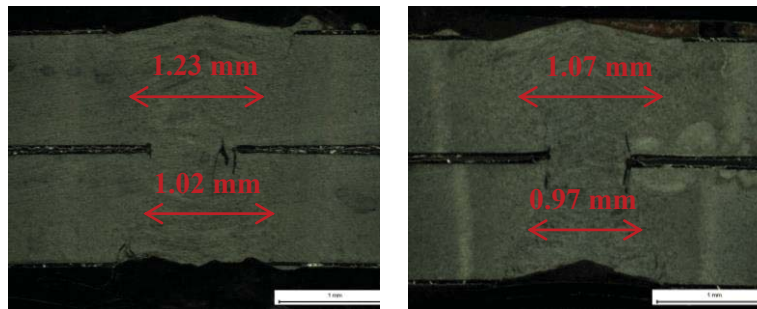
Cross-sections of 3.5 m/min welds of double hat (left) and single hat geometry (right).
